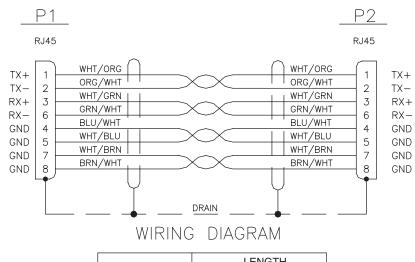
CAT-5 Crossover Cable (P/N 830-0723-xx)
